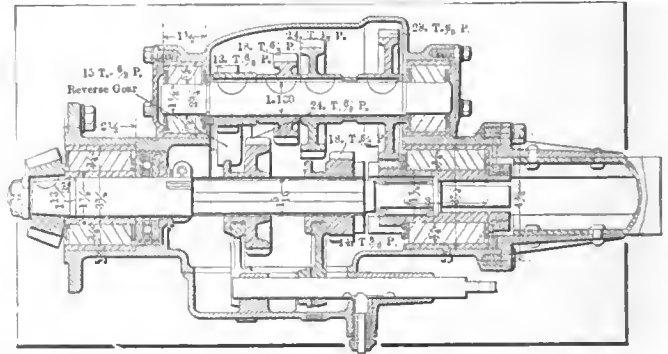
Regal transmission gear, showing compactness, and Hyatt nickel steel roller bearings
